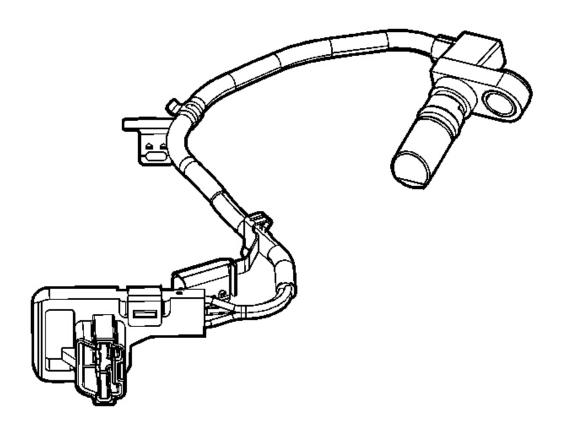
View Of A/T Input Speed Sensor Assembly Courtesy of GENERAL MOTORS CORP.
